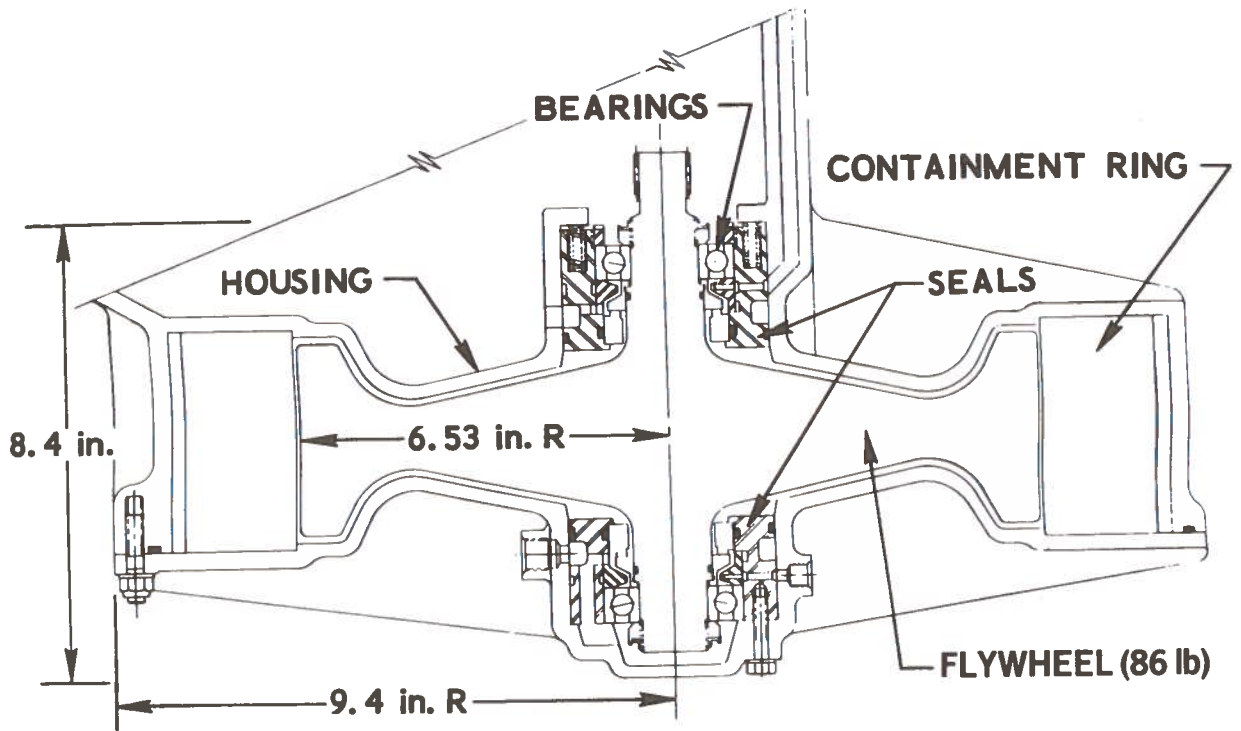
LOCKHEED BASELINE FLYWHEEL (Ref. 3-12)
